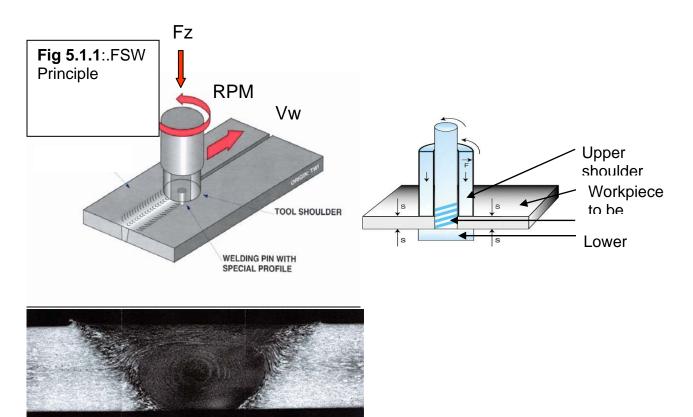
Photomicrogragh of welded zone
